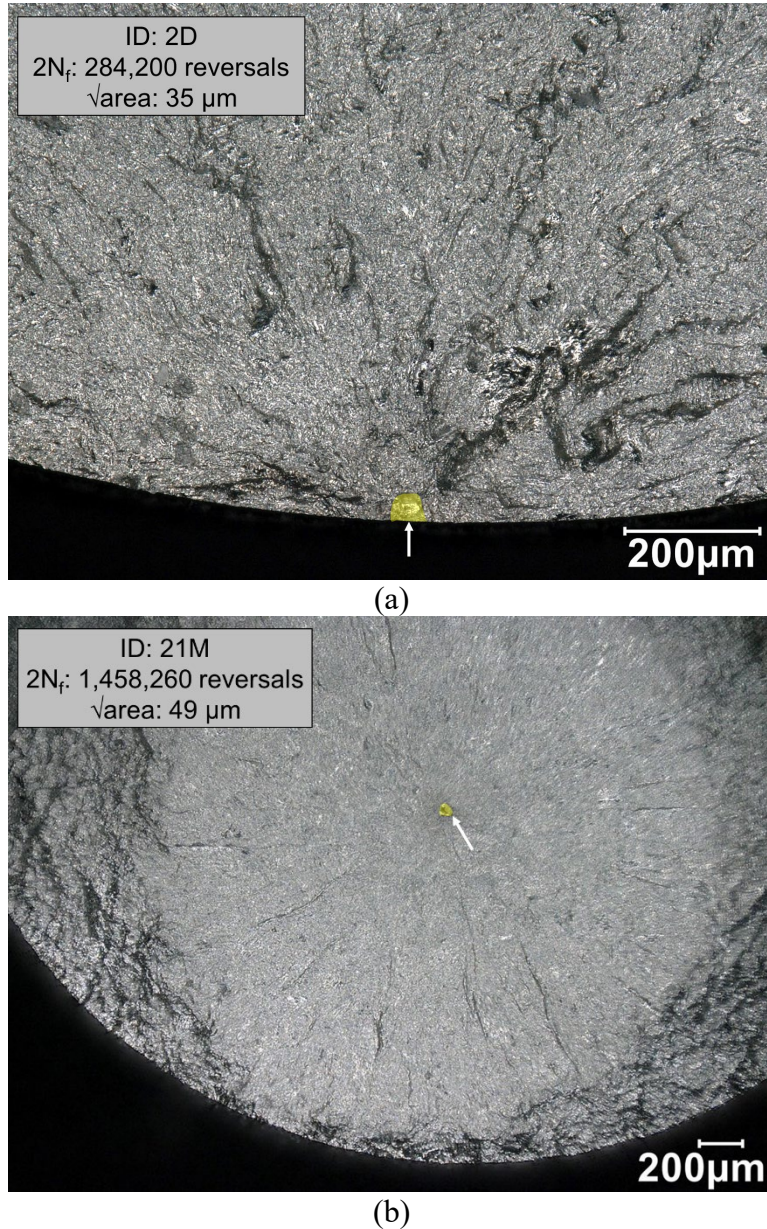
Fracture surfaces of L-PBF Ti64 specimens manufactured using (a) default and (b) modified scan patterns. Both specimens were tested at 600 MPa.
